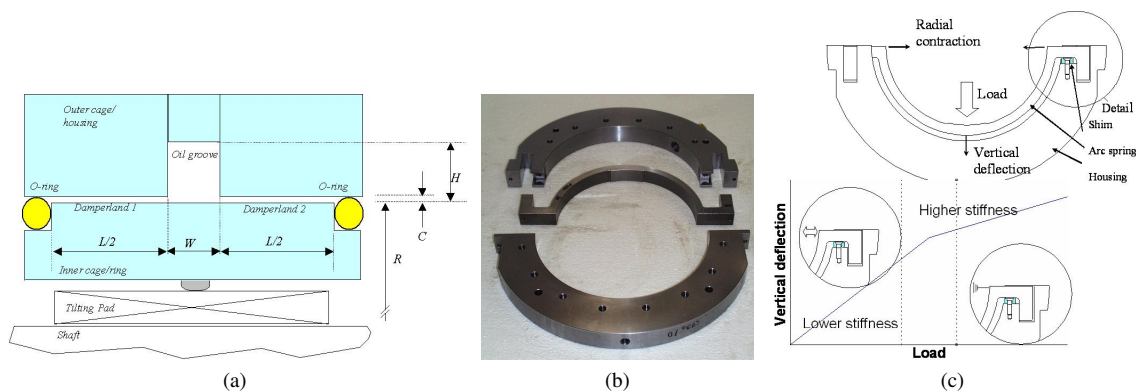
(a) Cross-section of the SFD bearing , (b) Arc spring beam, (c) Illustration of the stiffness behavior
